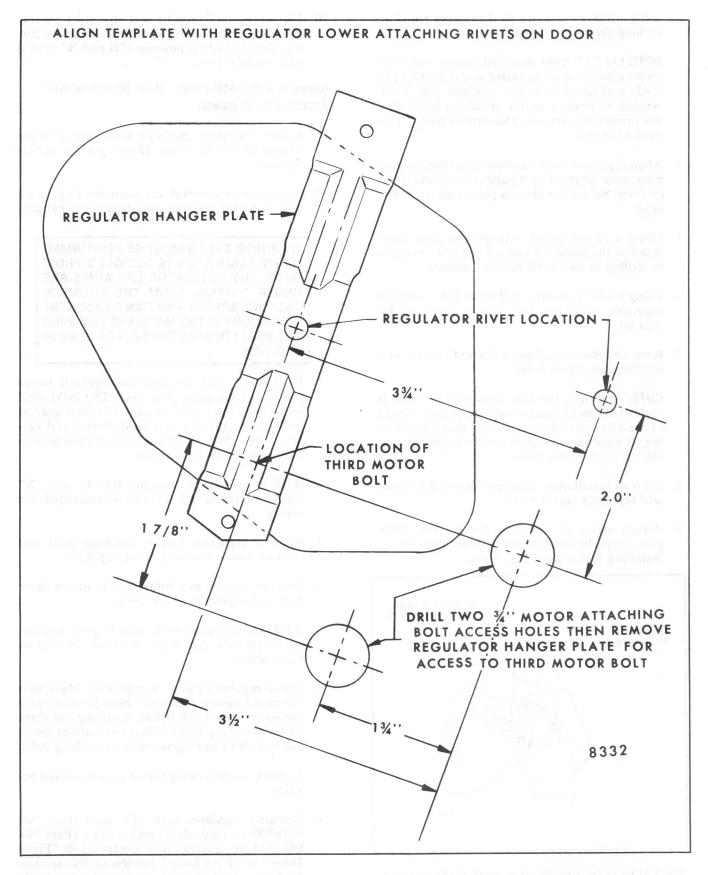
Window Regulator Lower Attaching Rivet Reference Points for Locating Window Motor to Regulator Attaching Bolts
